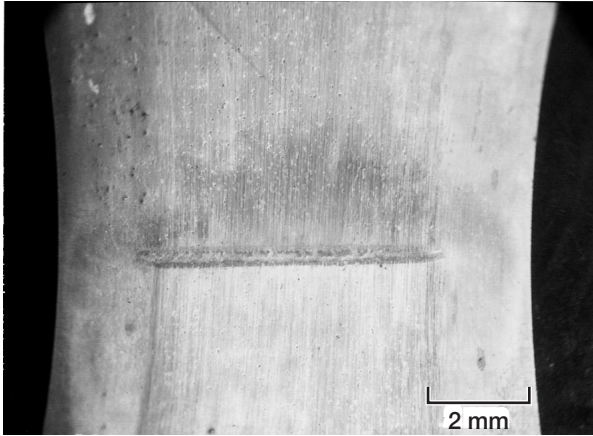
Wear scar produced on Ti-48Al-2Cr-2Nb fatigue specimen in contact with superalloy contact pad. Table 2(b.2) presents the fretting conditions.
